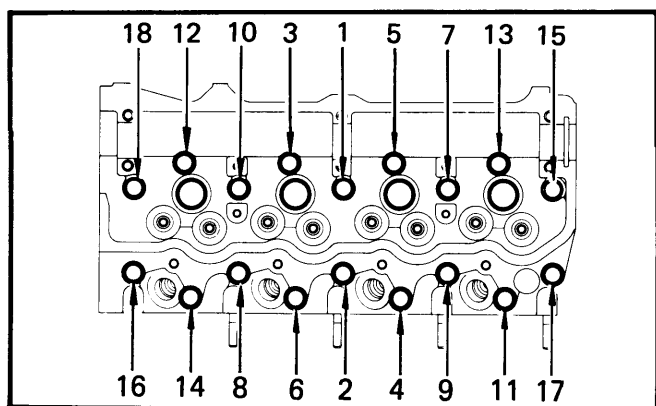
Cylinder Head Tightening Sequence (Loosen in Reverse Order to Disassemble)
